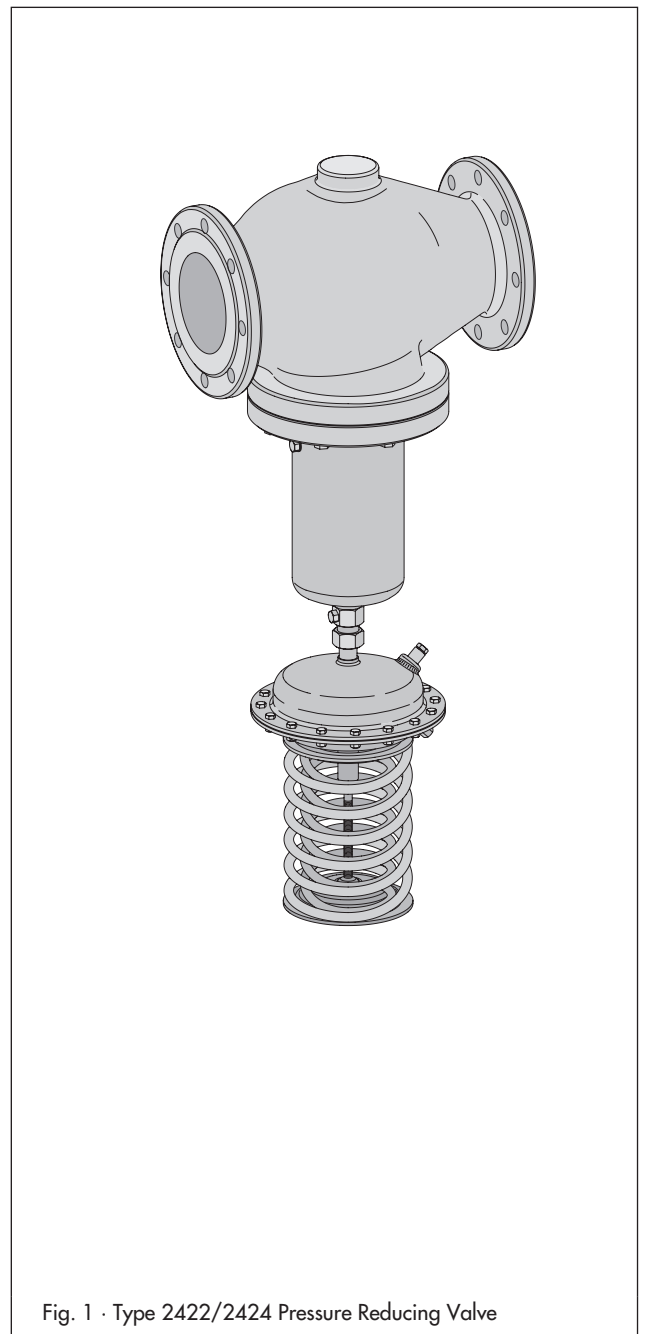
· Type 2422/2424 Pressure Reducing Valve
